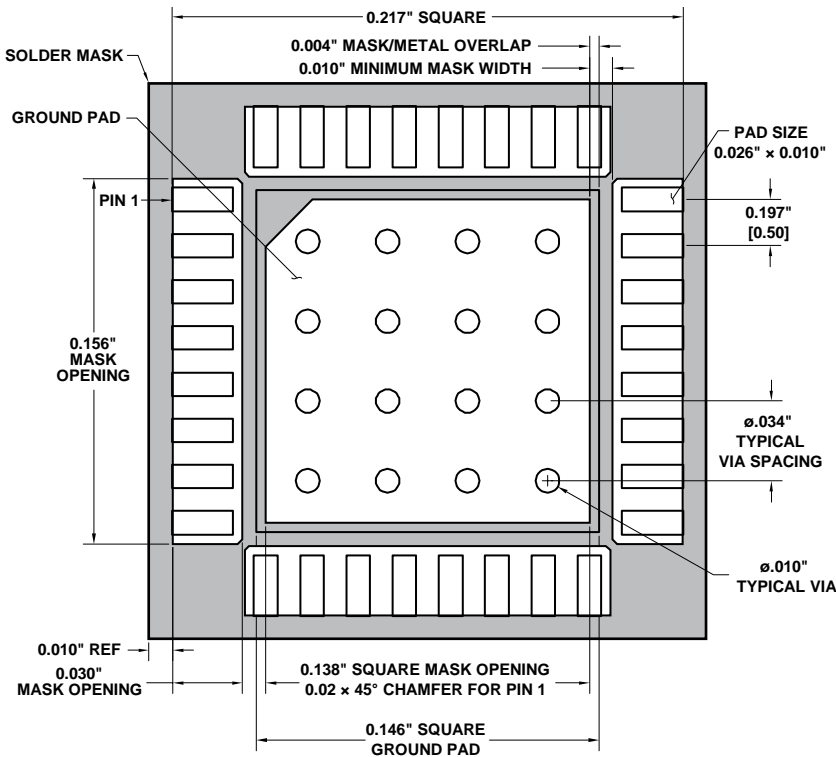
PCB Land Pattern Footprint of the [ADMV1010-EVALZ](#)
